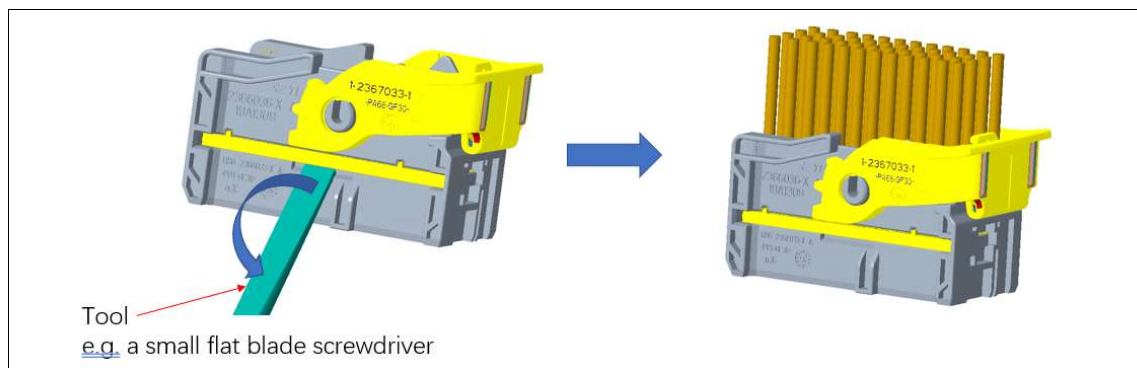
Pry TPA from End-locked to Pre-locked Position
